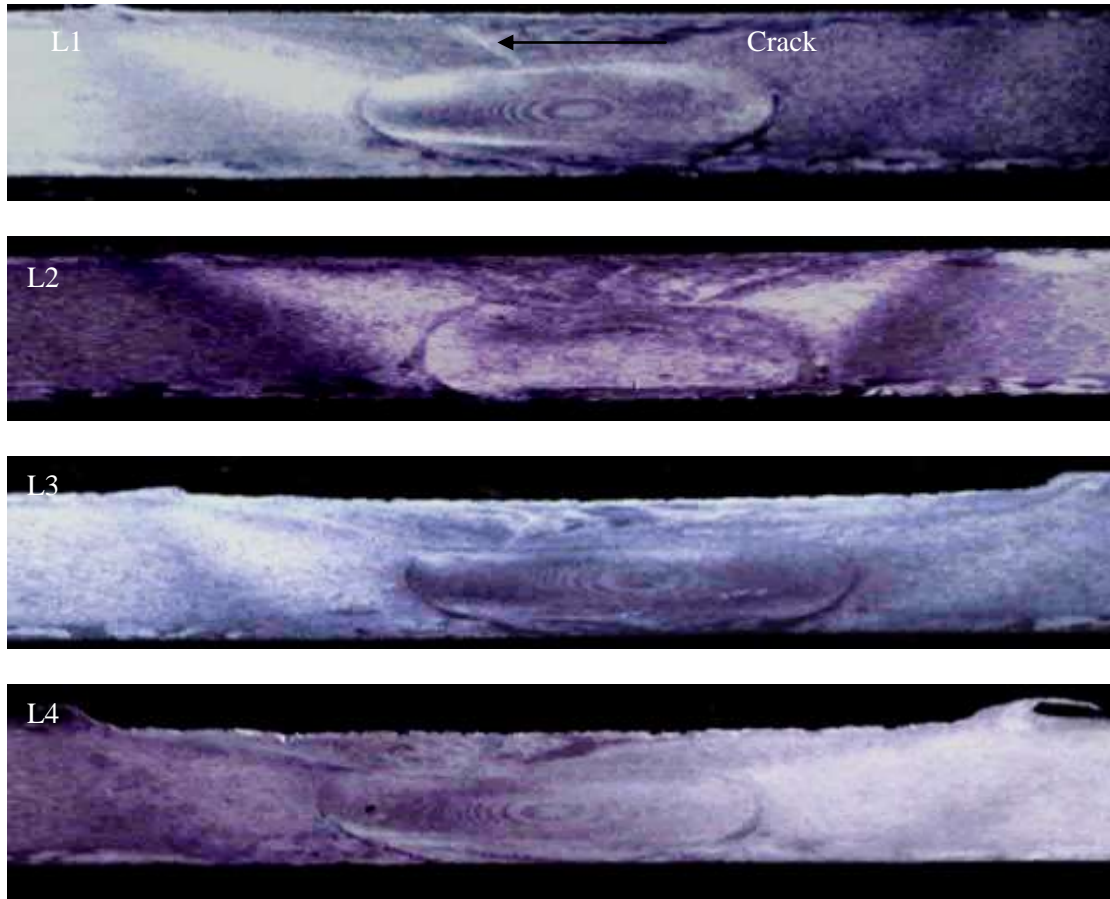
Optical macrograph of different joints: L1- 2 kN, L2- 3 kN, L3- 4 kN, L4- 5 kN.
